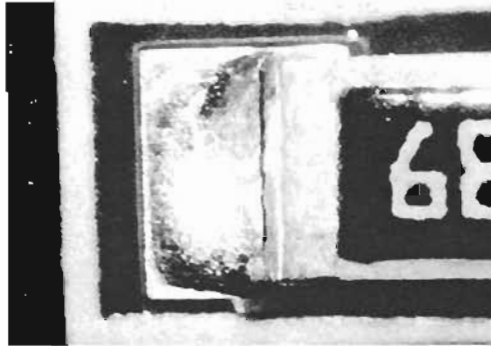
Cracked surface mounted component joint (EPS)
